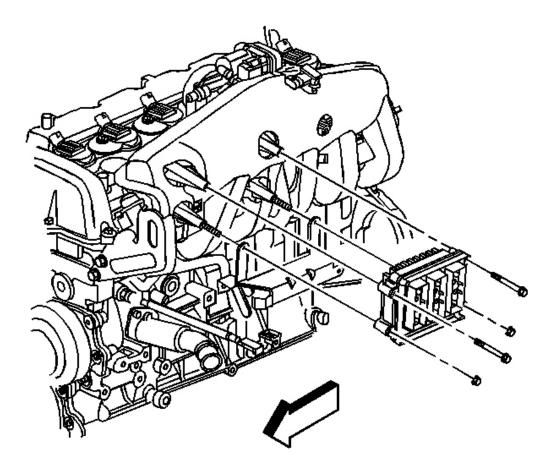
View Of Engine Electrical Harness Housing Courtesy of GENERAL MOTORS CORP.
